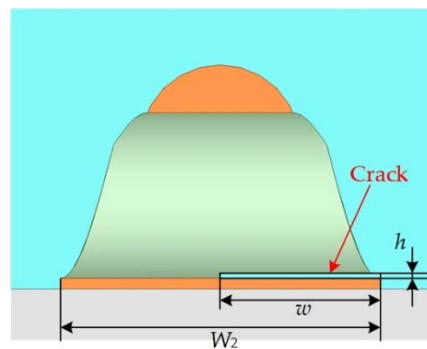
Parameterized model of the solder joint with the crack.
